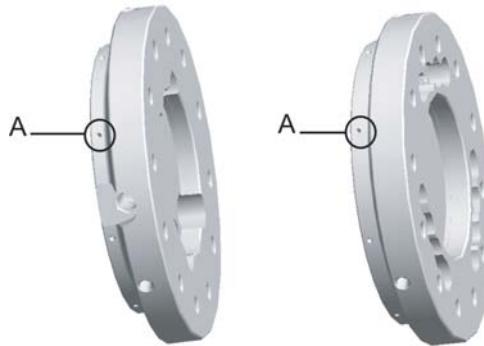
Seven holes A, on a radius of x mm from axis 6 center on the standard tool flange.
